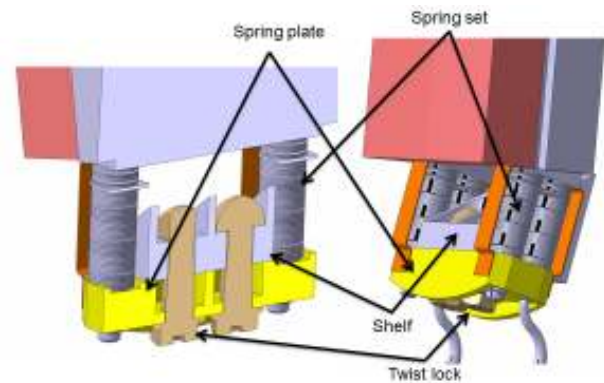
Spring set at the lower support of the inboard blanket segment.
